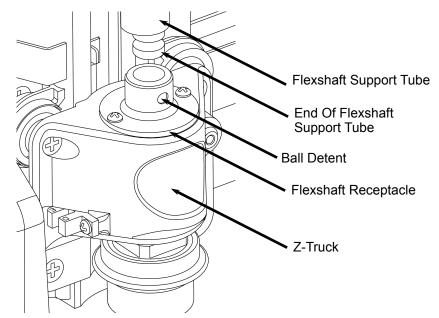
VIEW OF THE FLEXSHAFT CONNECTION TO THE Z-TRUCK
